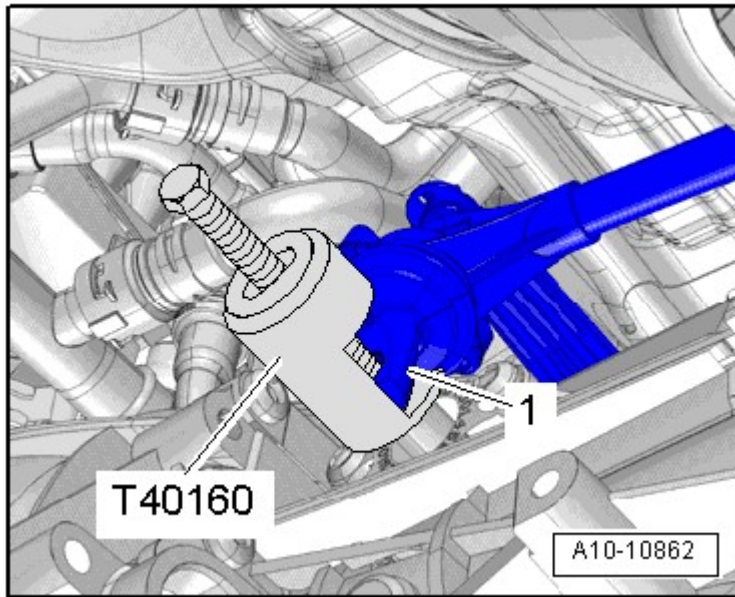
Positioning Puller T40160 And Remove Selector Rod
